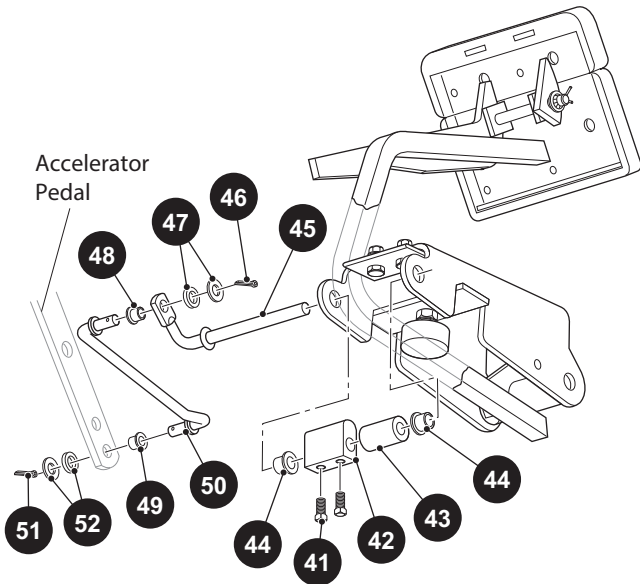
Parking Brake Release Linkage and Kick-Off Cam Removal and Installation.
